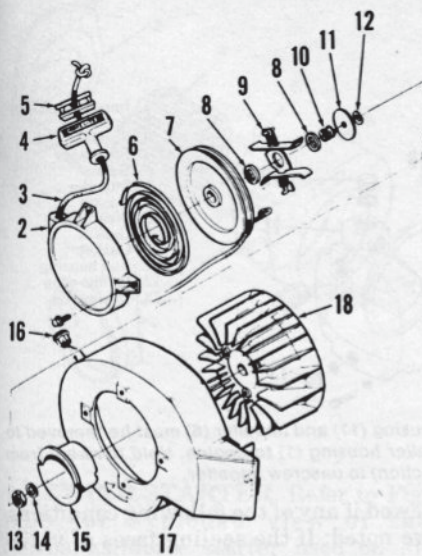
Exploded view of Fairbanks-Morse rewind starter. Starter cup (15) has rope notches so that engine can be started with starter assembly removed. Early type fan housing (17) is shown; later fan housing and magneto back plate (37—Fig. HL5) are integral.
